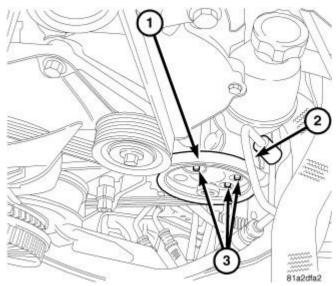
Generator & Mounting Bolts Courtesy of CHRYSLER LLC
